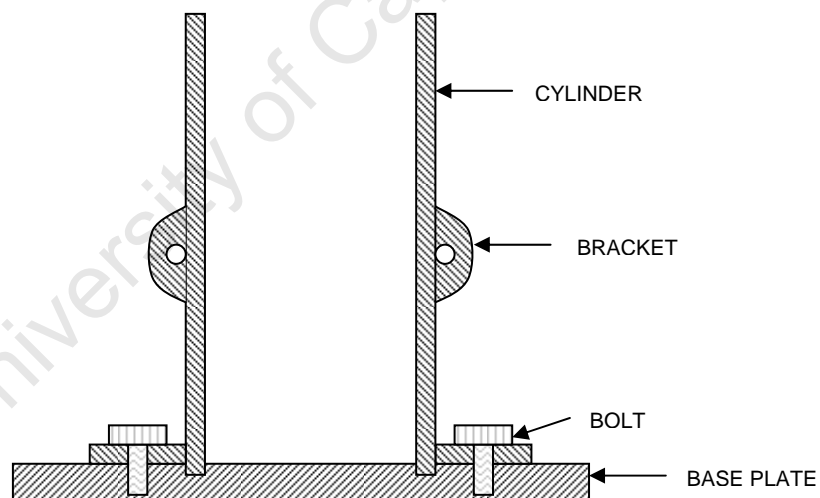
Schematic arrangement of a steel cylindrical mould illustrating the layout of the components
